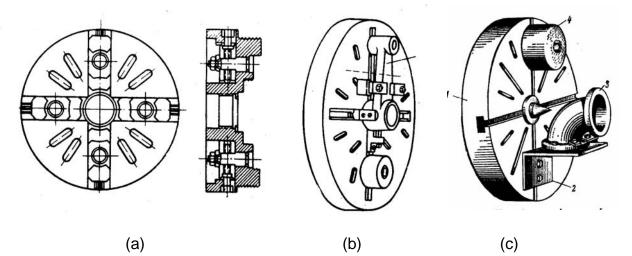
Mounting of odd shaped jobs on face plate in centre lathe
